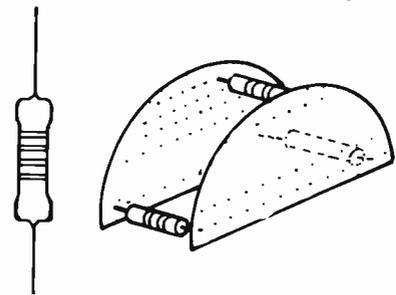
Cut the resistor leads as shown at left and then solder three resistors to two half-discs as shown to make a rigid assembly.
